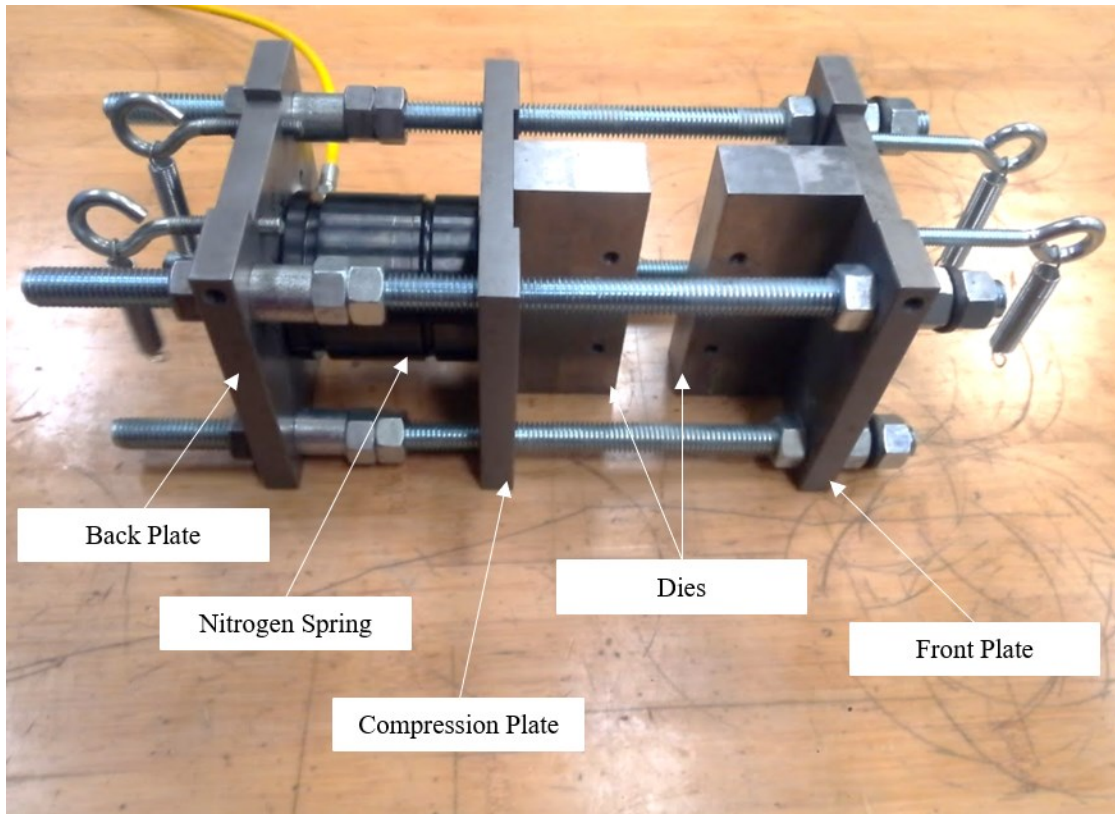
Through-thickness shear fixture. The nitrogen spring provides the required clamping force to minimize gauge region rotation of the specimen.
